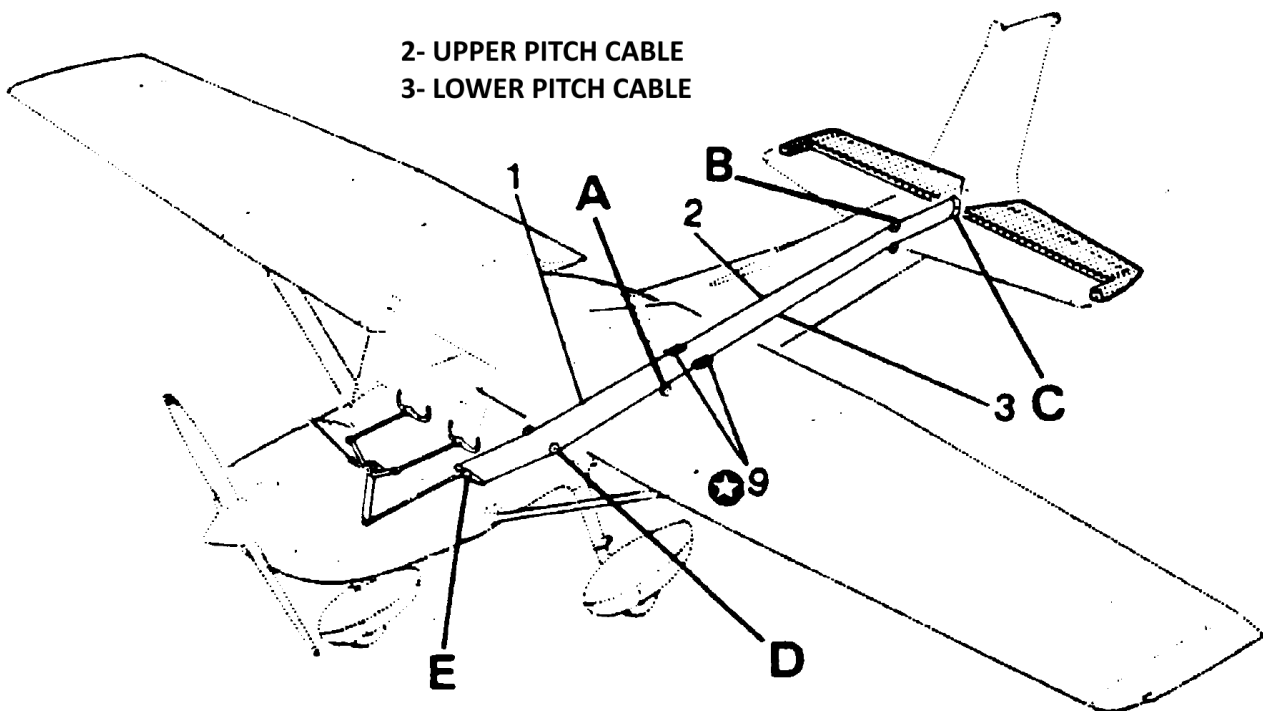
ELEVATOR CONTROL SYSTEM
